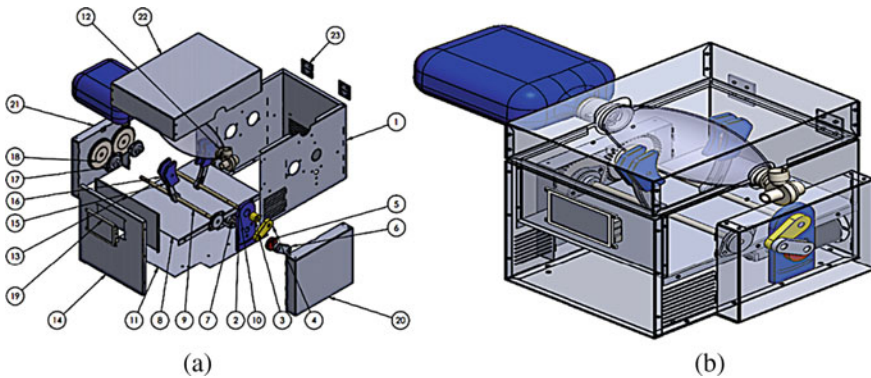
a Mechanical ventilator assembly, b 3D Mechanic ventilator prototype
